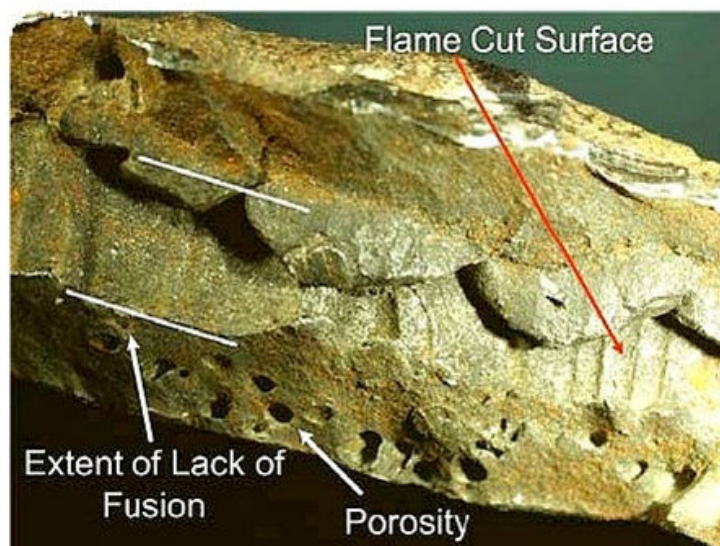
Recovered patch plate weld from failed Tank 7
